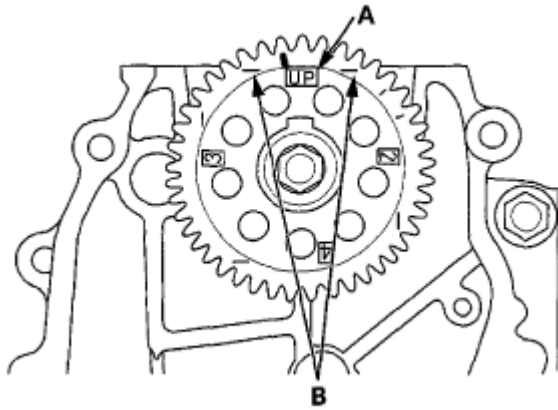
Locating UP Mark On Camshaft Sprocket And TDC Grooves On Camshaft Sprocket
